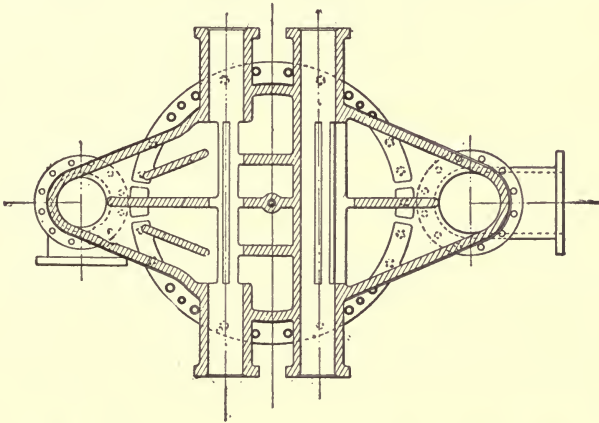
Cylinder Section with Ribs and Pipe Nozzles.
